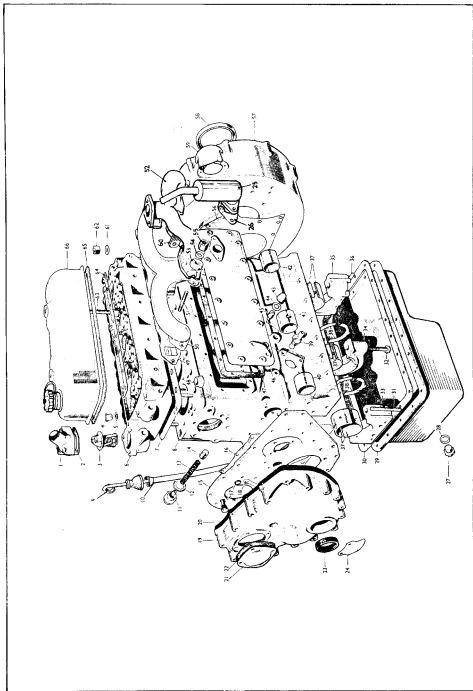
· 2.5 LITRE DIESEL · BASIC ENGINE ASSEMBLY
